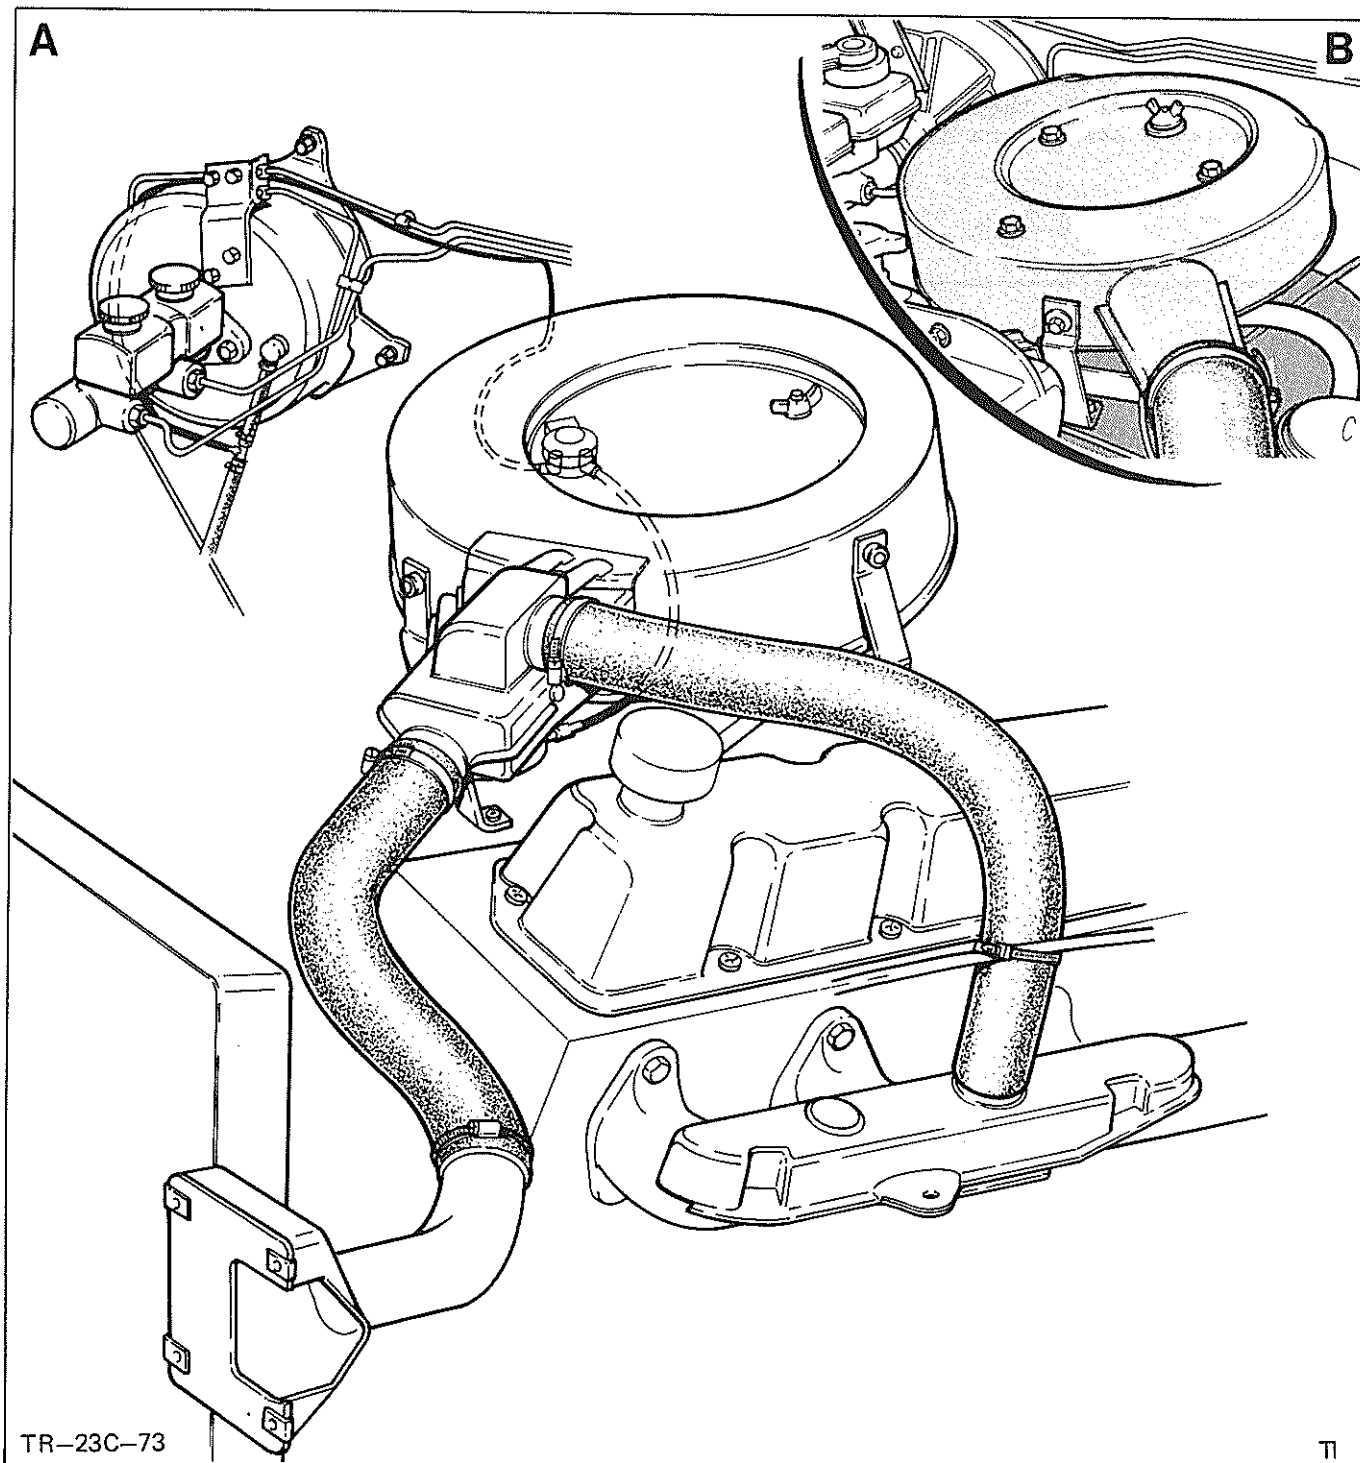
A - Thermostatically controlled air cleaner (Bosch injection system)
